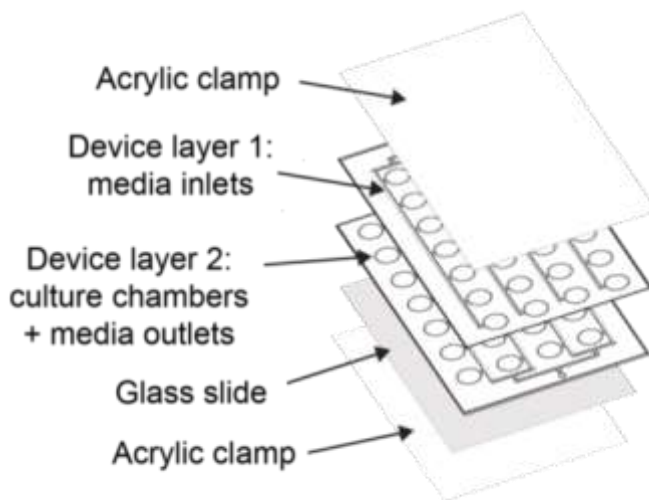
Assembly of the device. Schematic shows each of the device layers and order of assembly.
